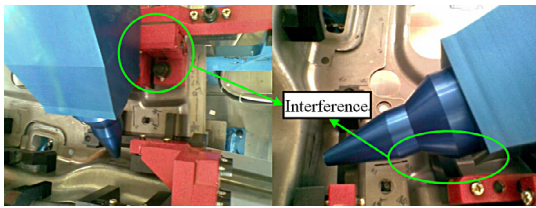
Interference of welding heads with fixtures and parts.
